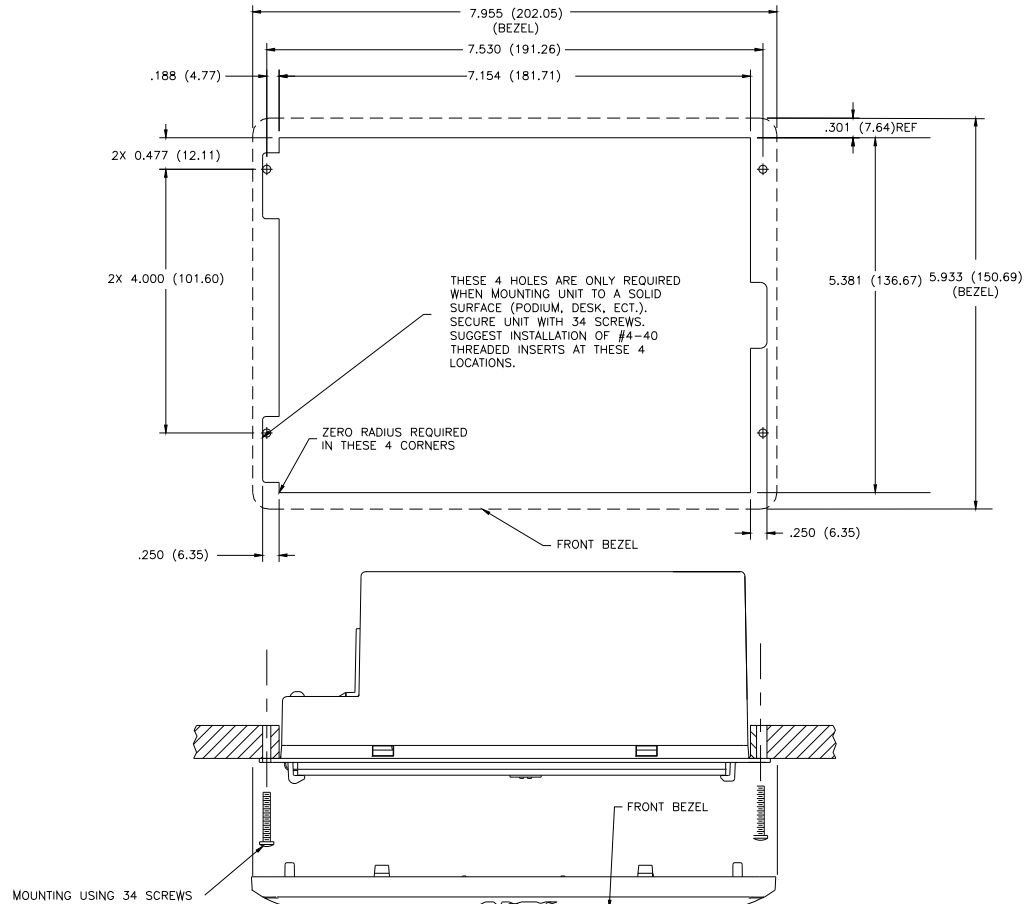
NXD-700Vi Wall Mount panel dimensions using #4-40 mounting screws
